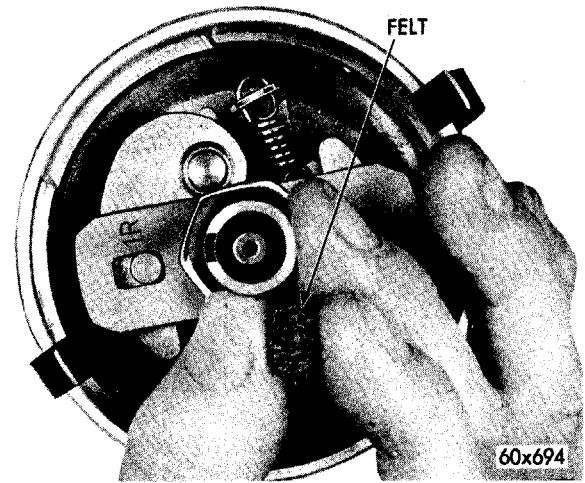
Removing or Installing Oiling Felt from Distributor Cam (6 Cylinder Typical of 8 Cylinder)
